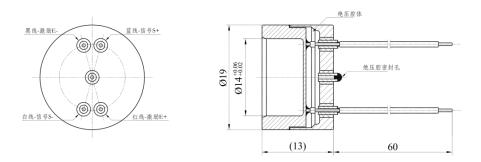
Dimension of absolute pressure or sealed gauge and lead definition
